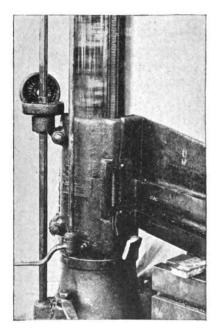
Broken Housing of Radial Drill Courtesy of C. & C. Electric and Manufacturing Company
